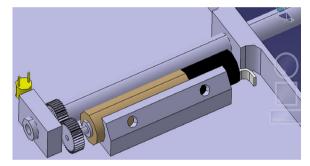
Enlargement of one motor and planetary gearheads, showing spur gears and the motor fixing system.
